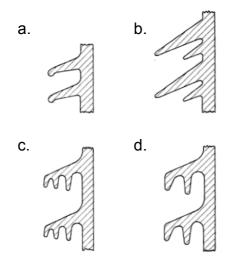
Common re-entrant profiles of insulators. None of these common shapes can be made by pressing or moulding, in porcelain. Sections must be made and stuck-up, or shapes must be turned
